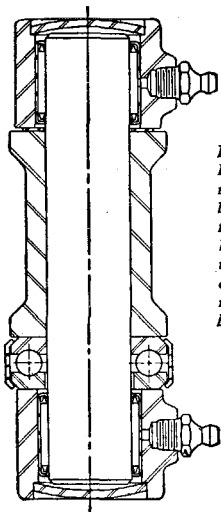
The Needle Bearings in this automobile king pin are lubricated with Alemite fittings through an oil hole in the center of the outer shell. These oil holes can be furnished on all Needle Bearings.
